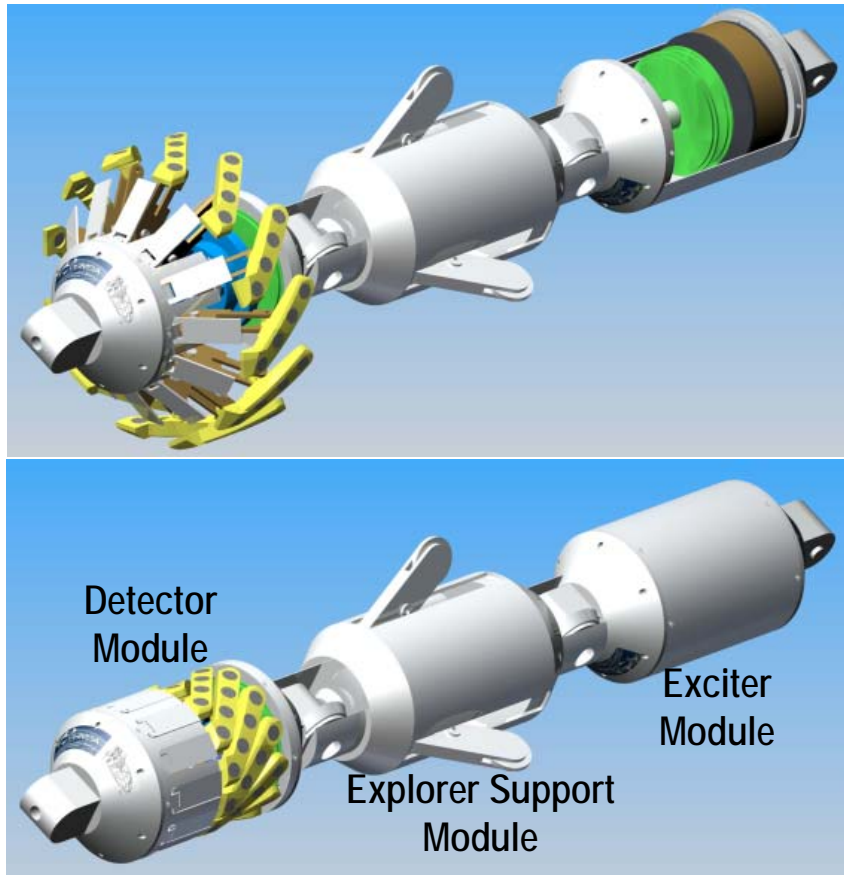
SwRI RFEC tool design as integrated with Explorer II robot:
